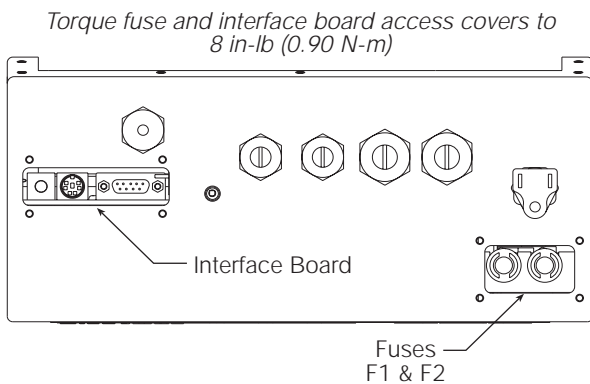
Interface Board and Fuse Locations, Desktop Model
